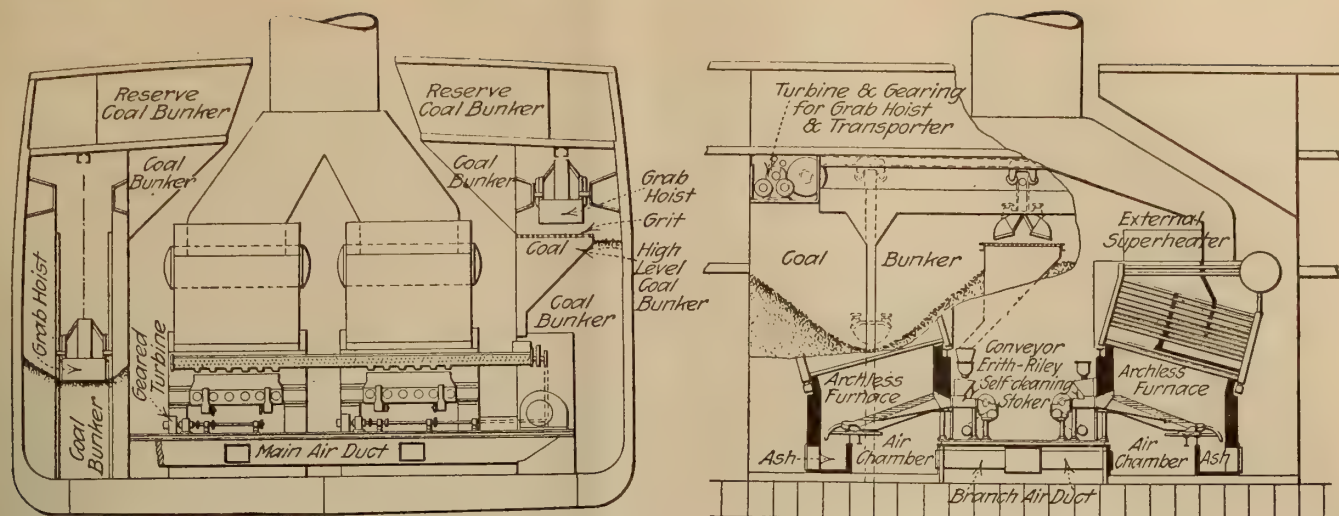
RILEY MULTIPLE RETORT STOKERS AND MECHANICAL COAL HANDLING AS INSTALLED BY ERITH, OF LONDON. INSTALLED ON NEW SHIPS ONLY
